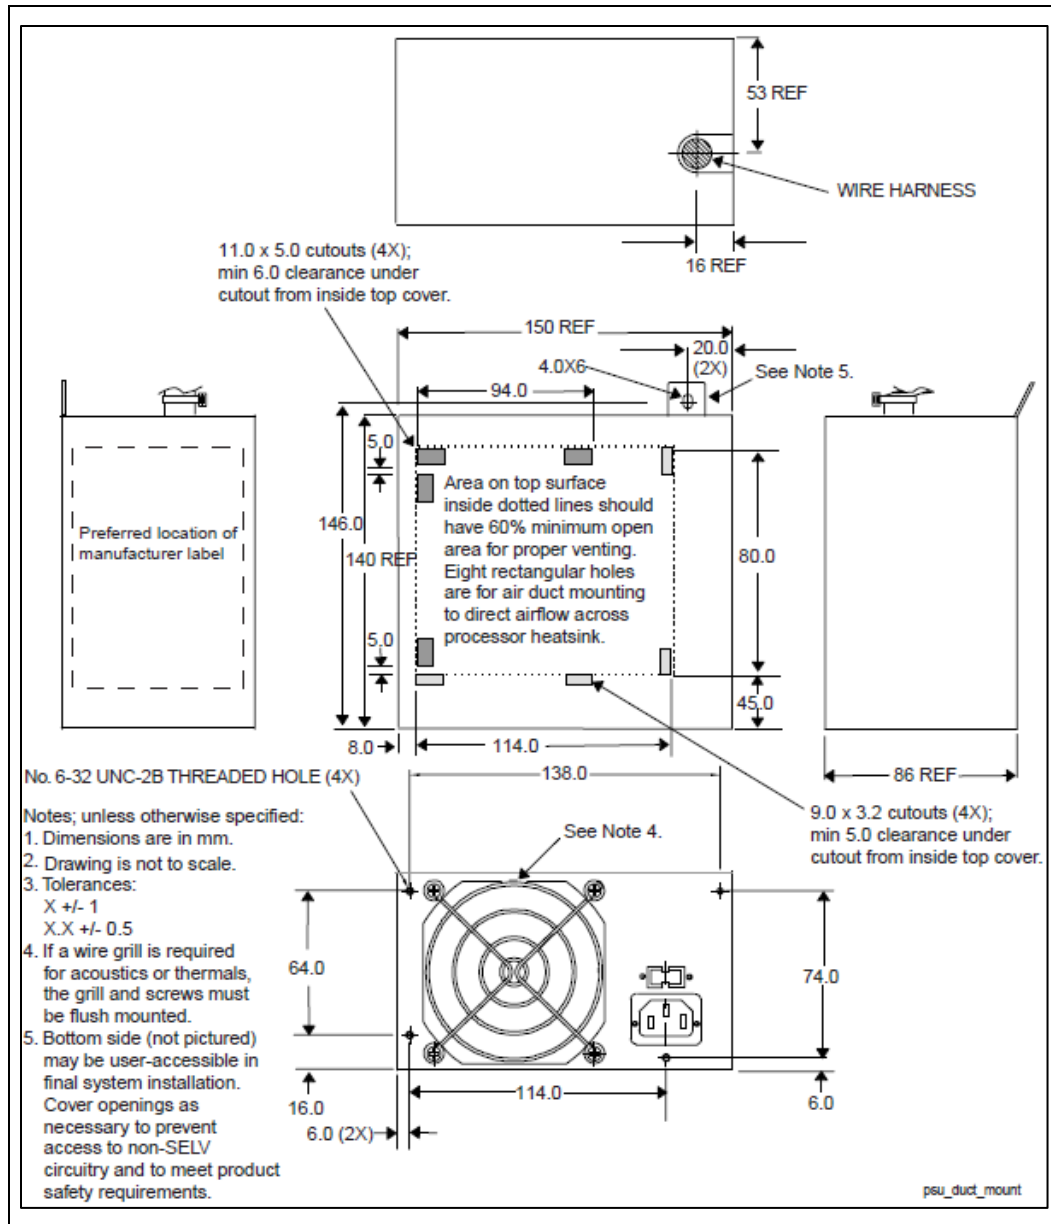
ATX12V Power Supply Dimensions for Chassis that Require Top Venting
